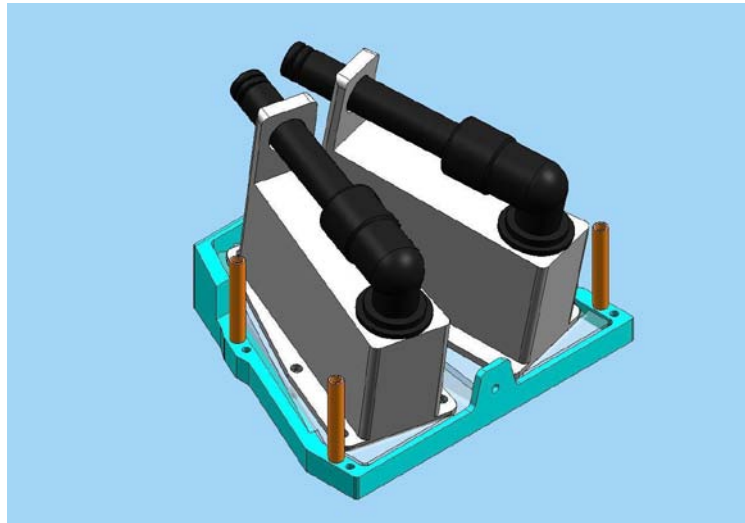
New dual phased array probe for austenitic weld inspection
